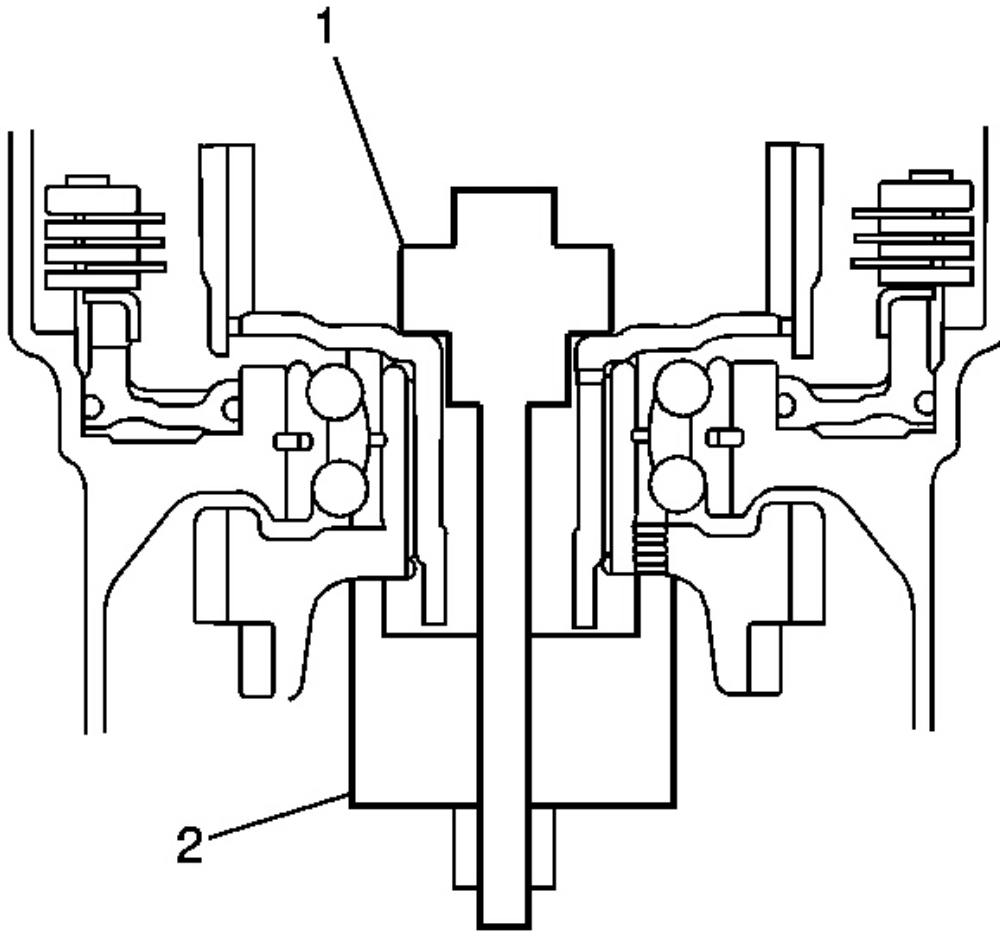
DT 46460, DT 46455 & Planetary Ring Gear
